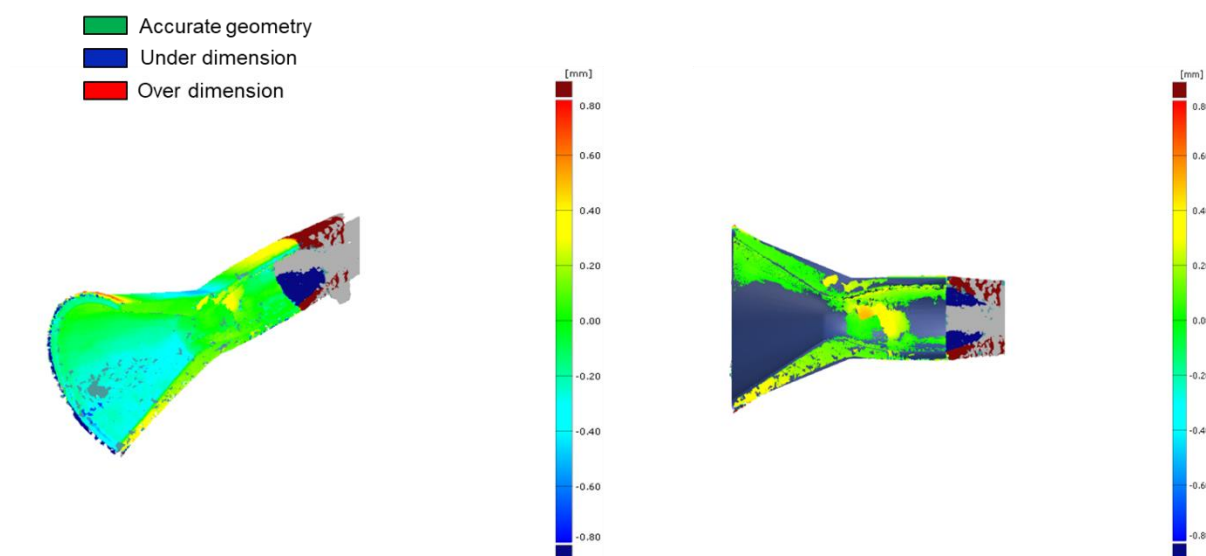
Laser scanning of the HIPed cross-section of thruster combustion chamber.
